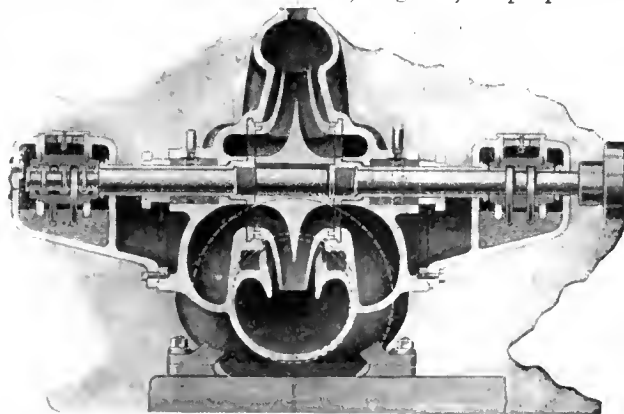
SECTIONAL VIEW OF CENTRIFUGAL PUMP SHOWING WATER PASSAGES IN CASING AND IMPELLER, ALSO SHAFT PROTECTING SLEEVES.
